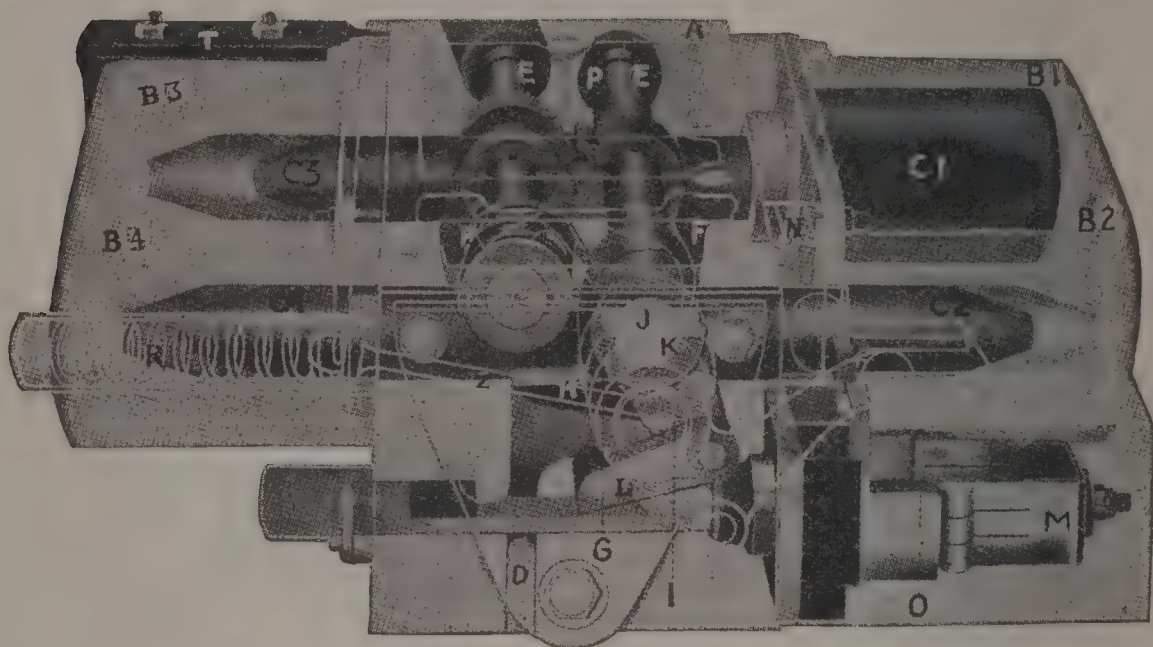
Phantom view of Cutler-Hammer electric gearshift
